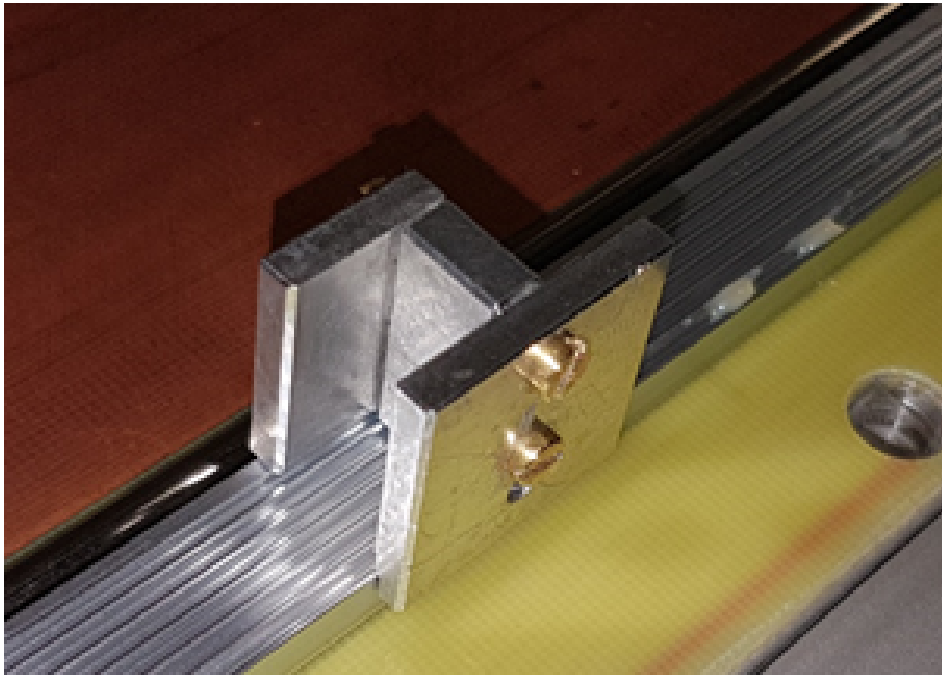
Photograph of the gluing tool on the mesh bars.
